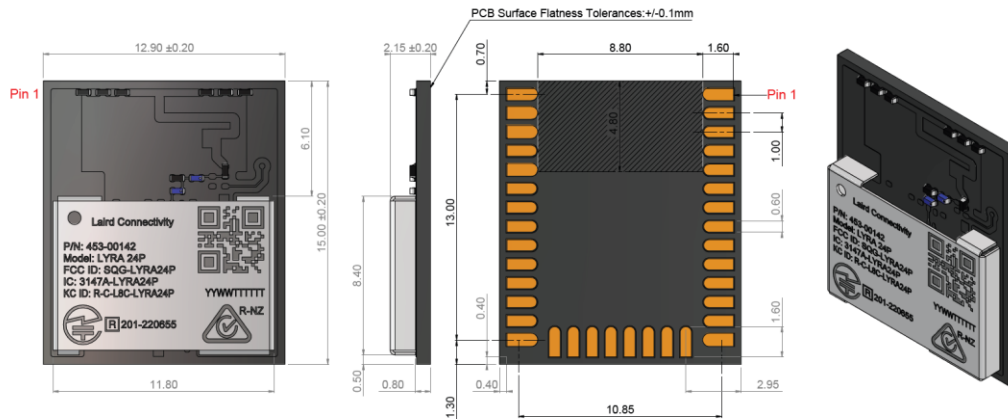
LYRA 24P +10 dBm Module dimensions (mm)
